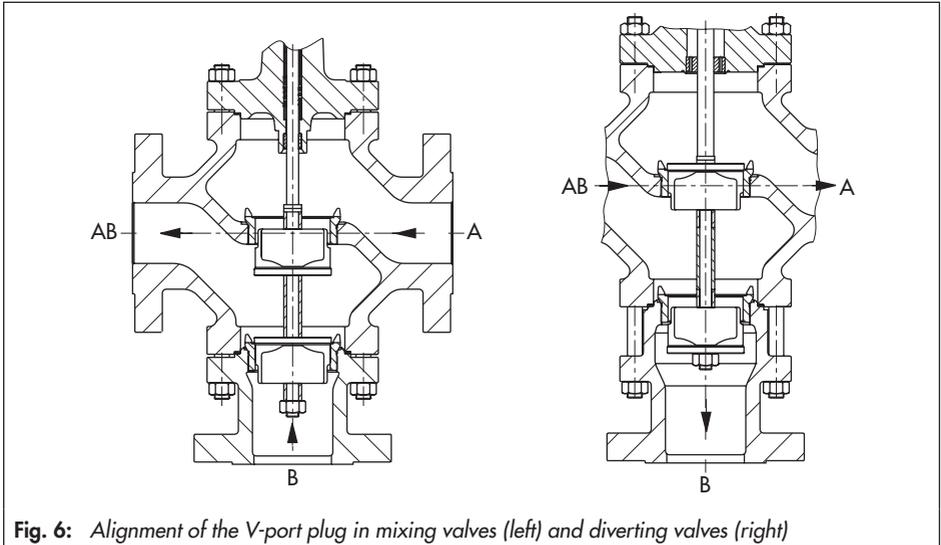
Alignment of the V-port plug in mixing valves (left) and diverting valves (right)
